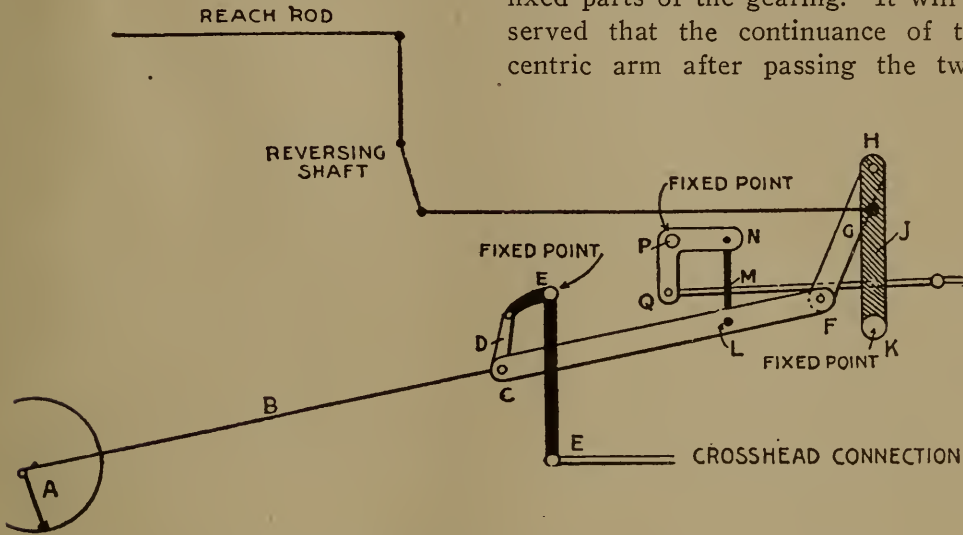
PURPOSELY DISTORTED SKELETON SKETCH OF GEAR.
